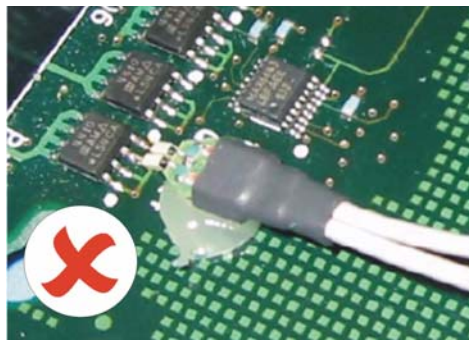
Incorrect securing method because glue is placed on the probe head tip
